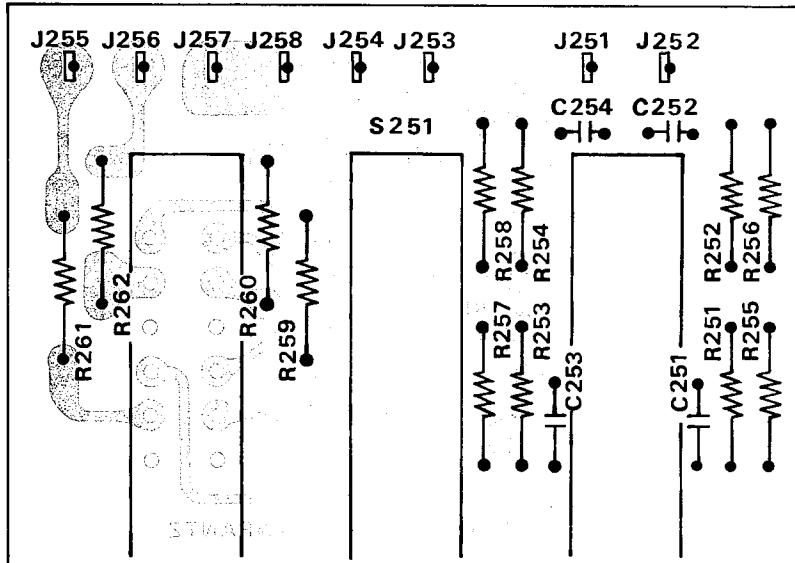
Tape Moni., Hi Filter Unit Assembly P250 Component Locations
